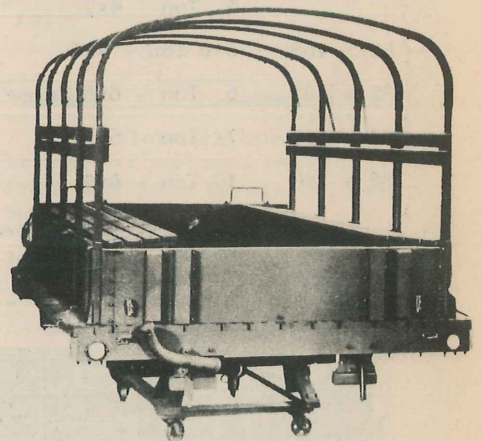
Cab end of the 1 1/2-ton wood body. Unfasten one bolt and slide a board out.
